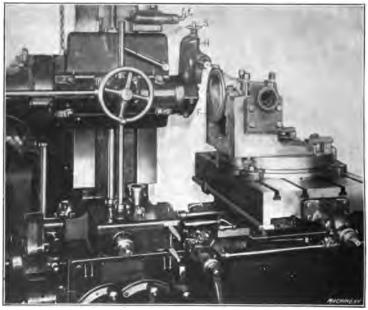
Facing and Turning Flange of Differential Gear Casing
